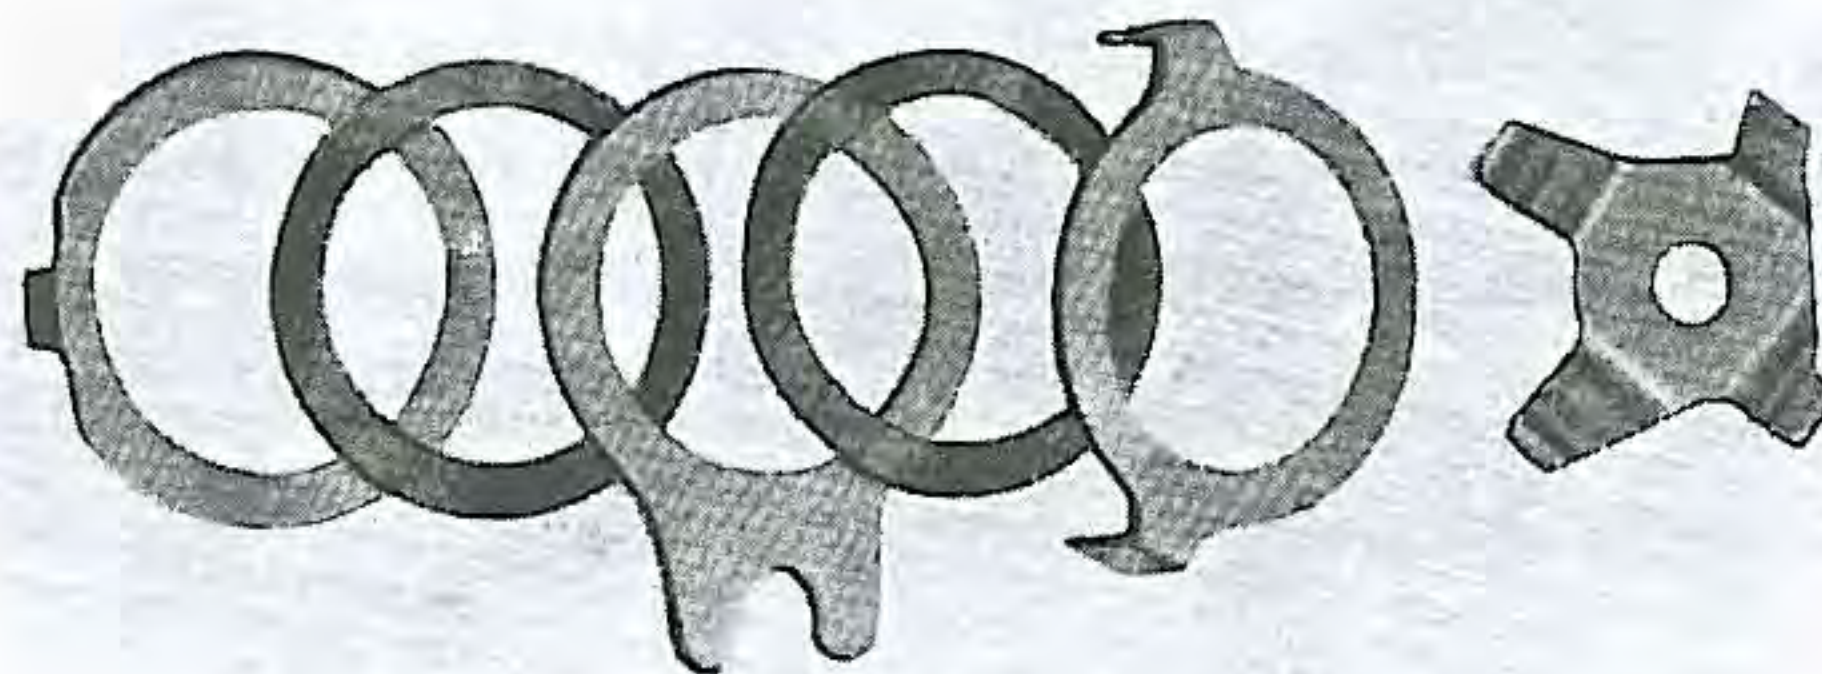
Display of steering damper friction plates. (CB92 CA95)
